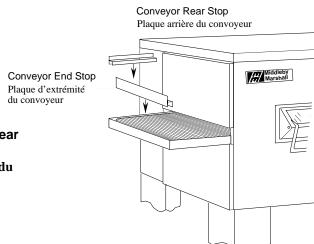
Installing Conveyor Rear Stop and End Stop Figure 2-13. Installation des plaques du
